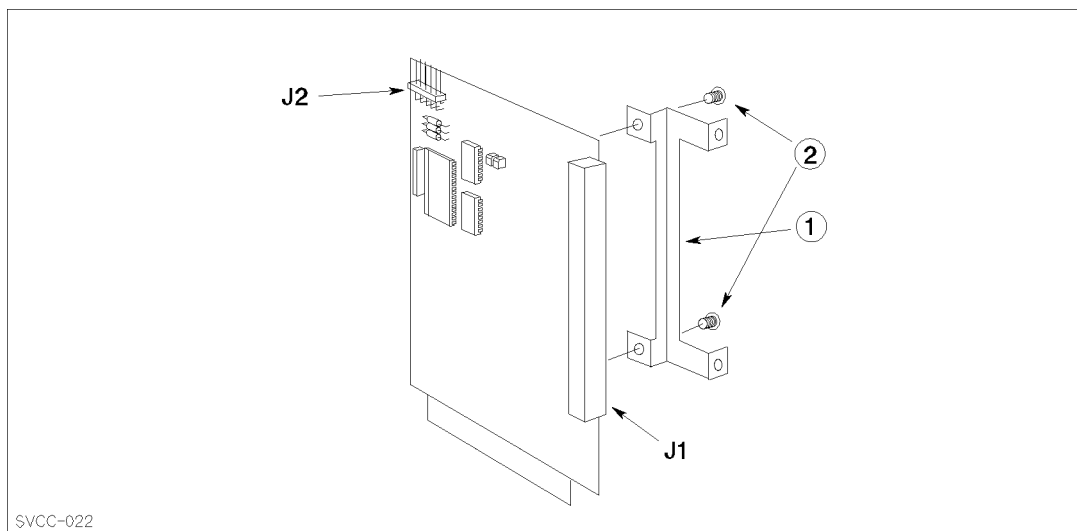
AUX Connector Board Part Locations (for Port Expander)
